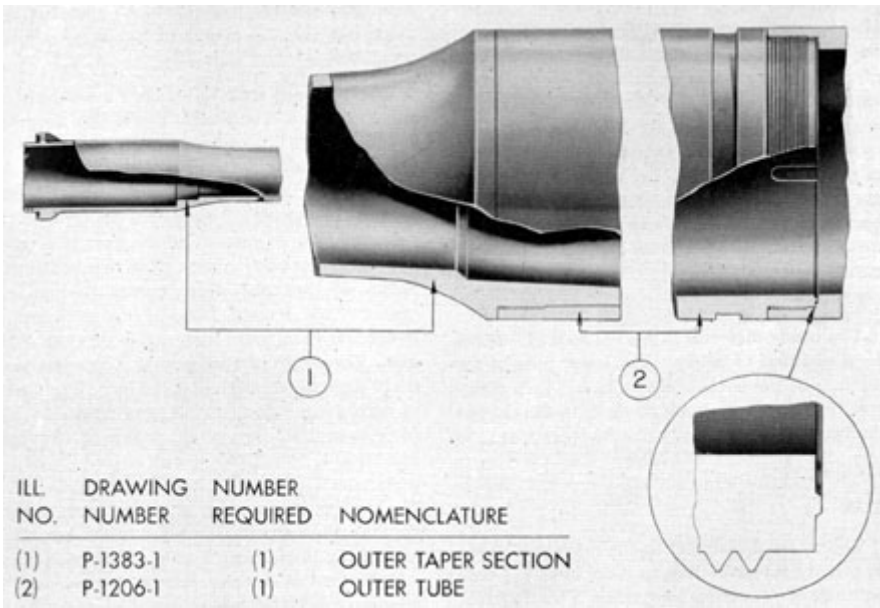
Outer taper section and outer tube, cross-sectional view. counterbore, 12 equally spaced holes are provided to accommodate lockscrews (1). The clearance holes are countersunk from the lower end of the radius of the flange.
